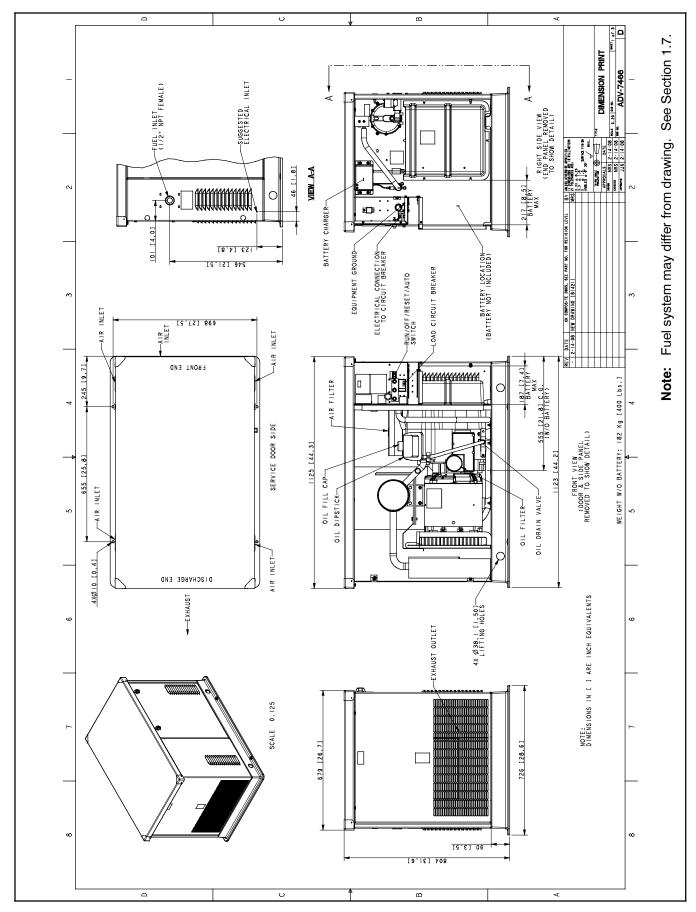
Generator Set Mounting Details and Dimensions, 12 kW Models, ADV-7466, Sheet 1
